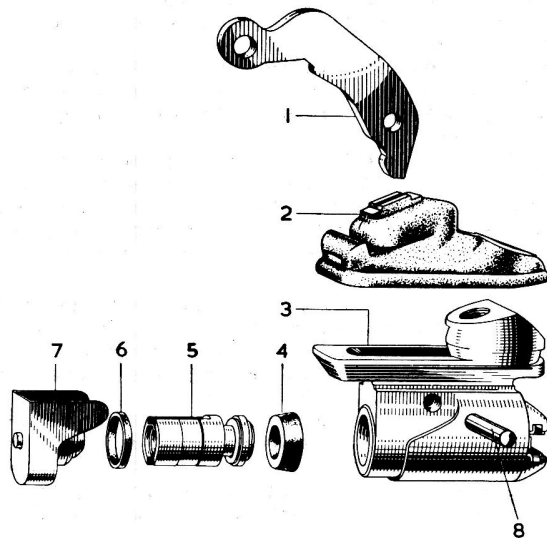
EXPLODED VIEW OF REAR DRUM BRAKE WHEEL CYLINDER
